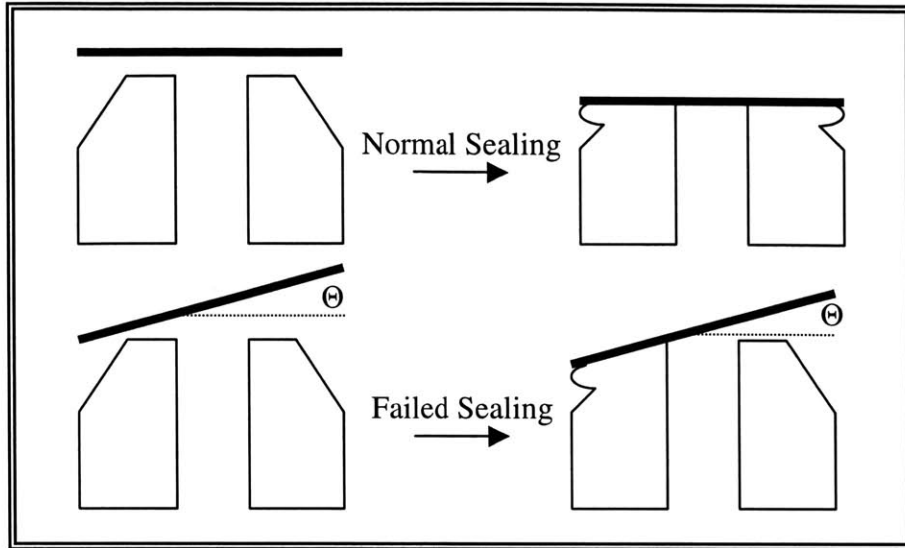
Proper valve port sealing juxtaposed against a leaking valve port demonstrates the importance of valve seat deformation
